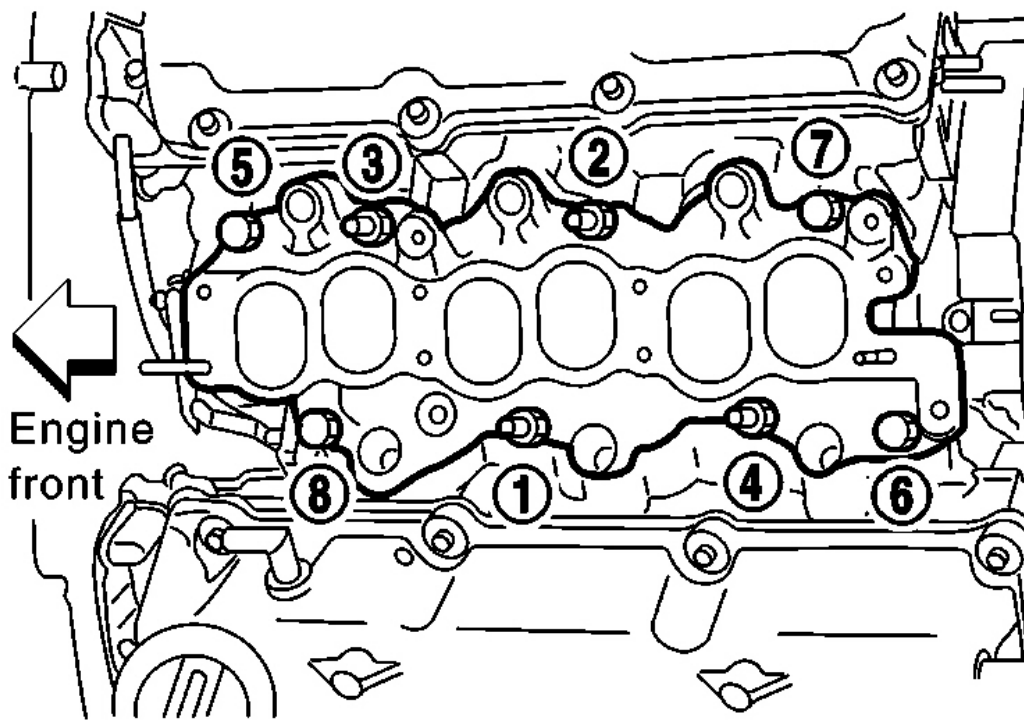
Removal And Installation Of Outer Component Parts (2 Of 2)
